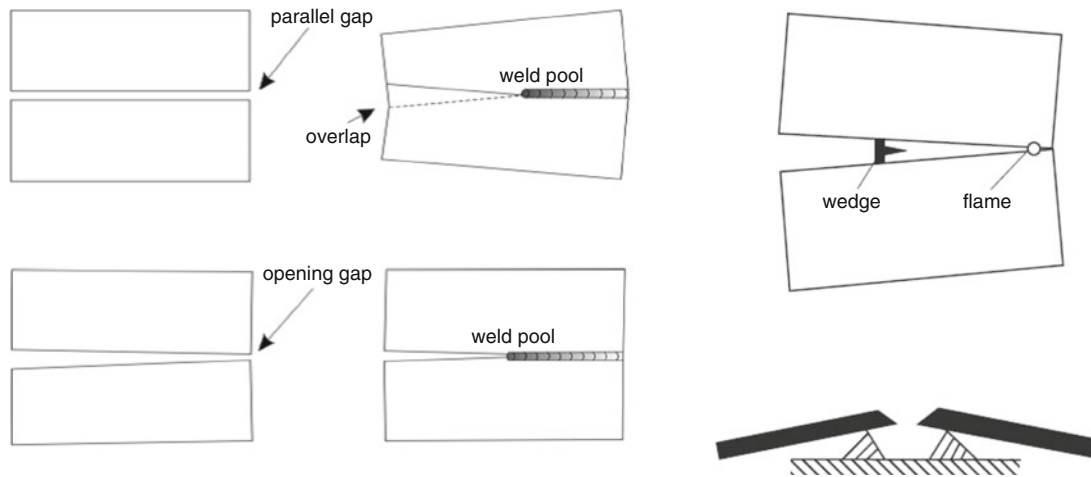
Excessive distortion and prevention on aluminum alloy welding. (Source: ISF report, 2010)
